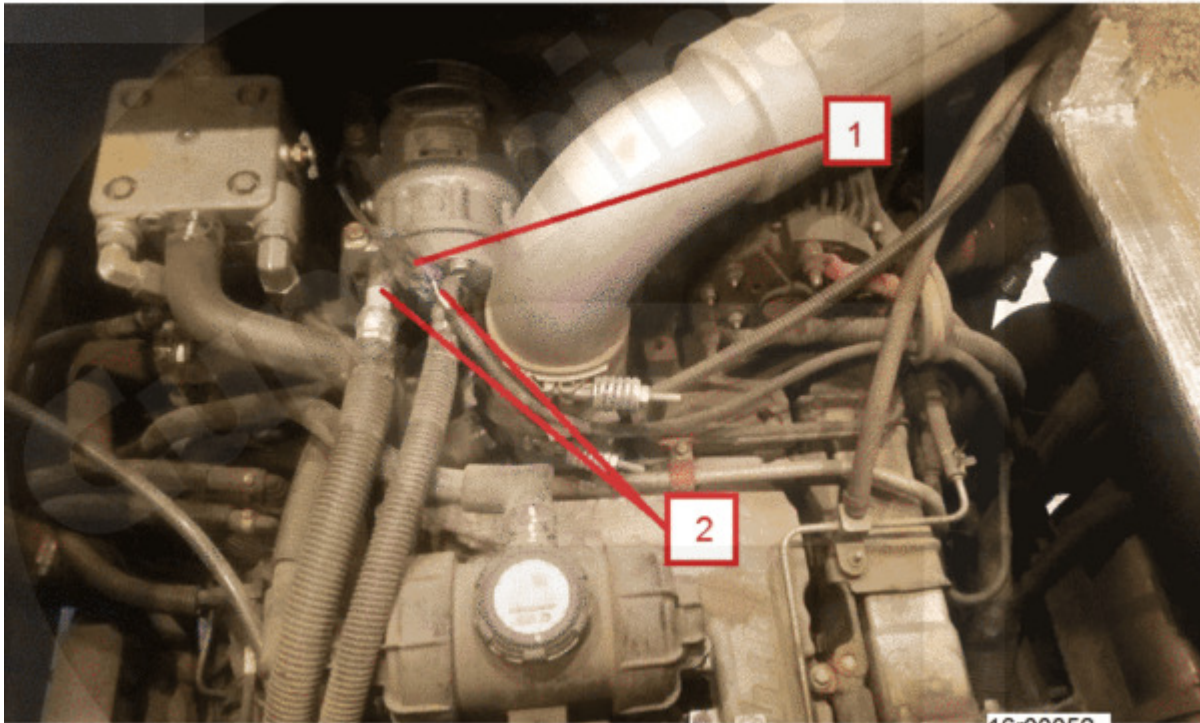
, OEM as built wiring harness routing to refrigerant compressor.
